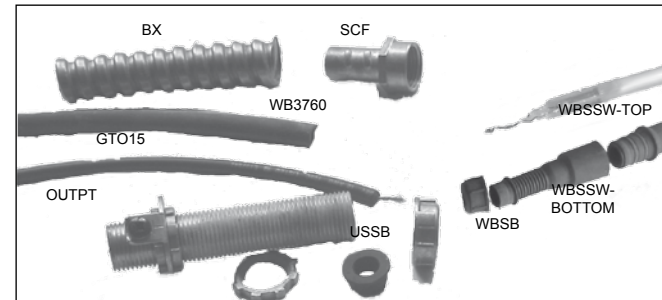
Disassemble the metallic bushing, the USSB and two locknuts from OUTPT
